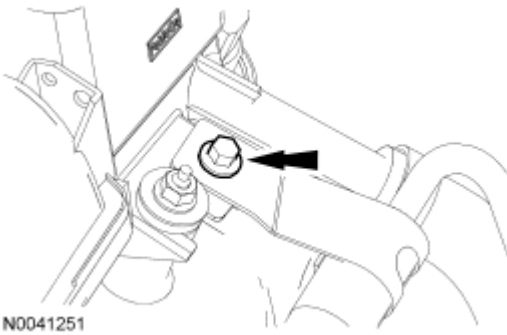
Locating Power Steering Pressure Hose Bracket-To-Power Steering Reservoir Bolt
